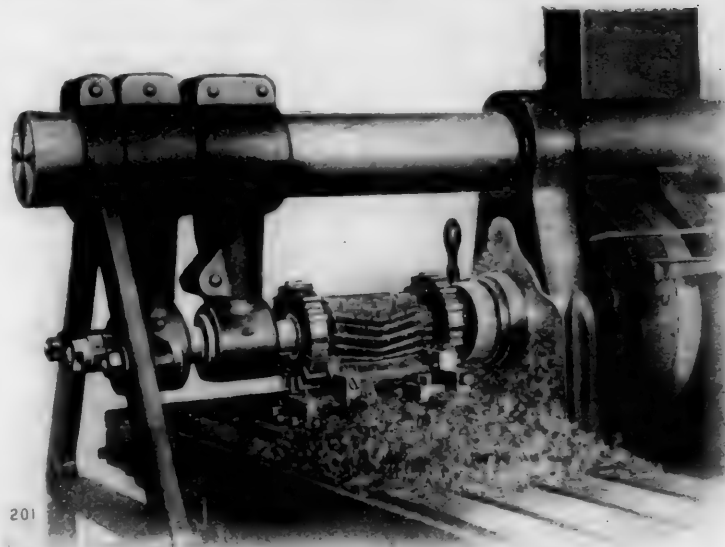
METHOD SUGGESTED FOR MILLING DRIVING BOX SHOES.
